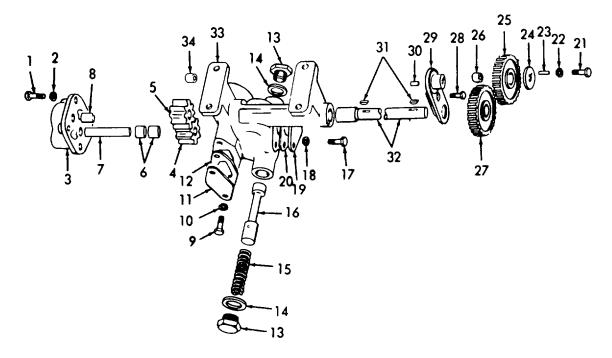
Oil Pump, Disassembly/Reassembly.
